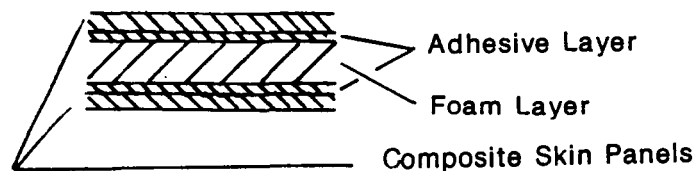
Typical Composite Panel Sandwich Construction Cross Section
